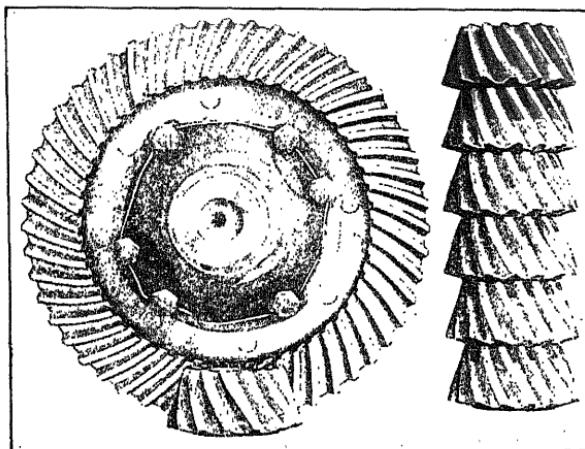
Spiral bevel gears. Foote Bros. Gear Co.
